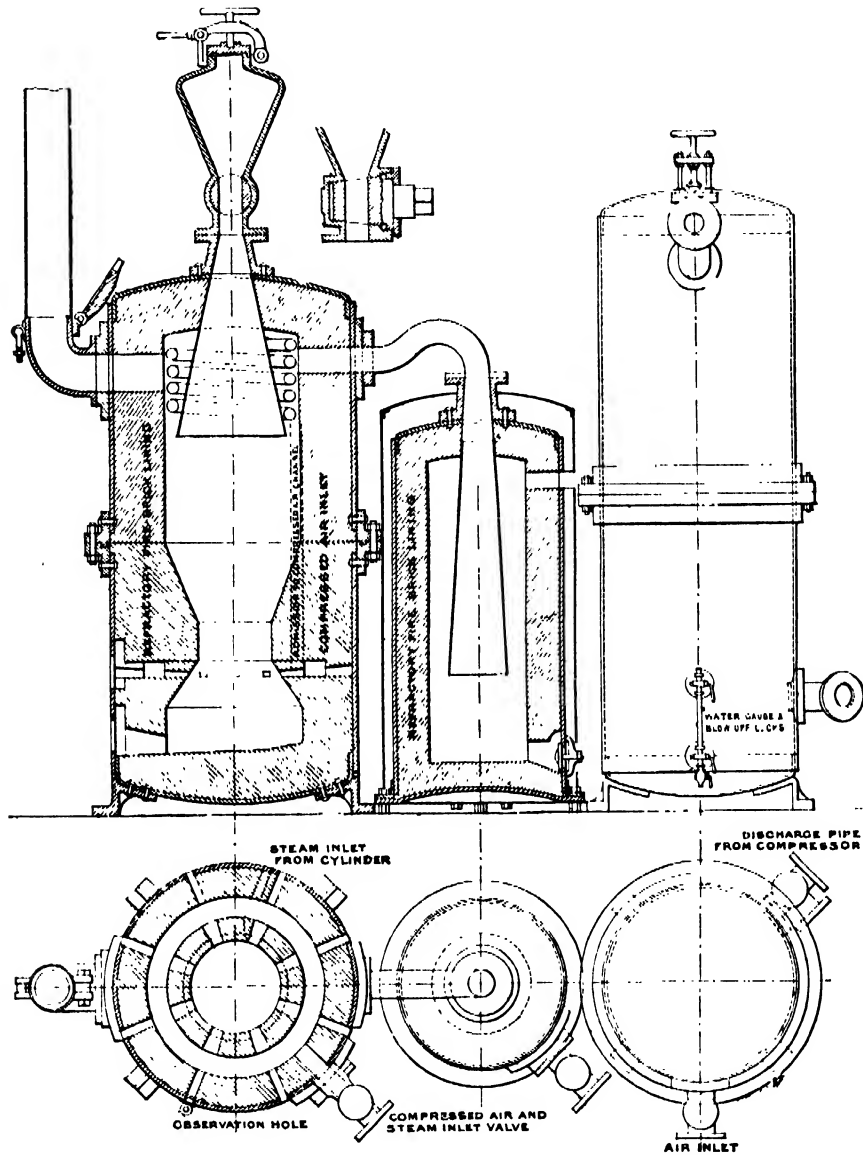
Sectional Elevation and Plan of Girdle Producer
